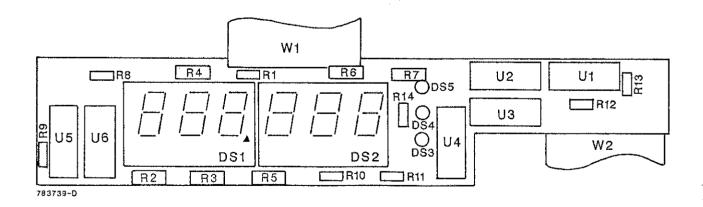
360° Display Circuit Card Assembly A2. Parts Location Diagram
